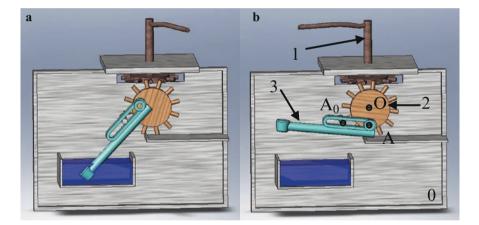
a 3D CAD model of Al-Jazari's fourt water raising machine. (a) Lower position, (b) upper position
